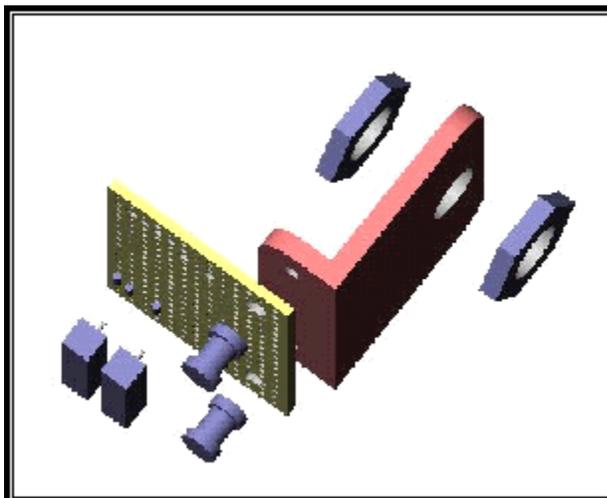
Bracket & PCB Board Assembly (View 3)
